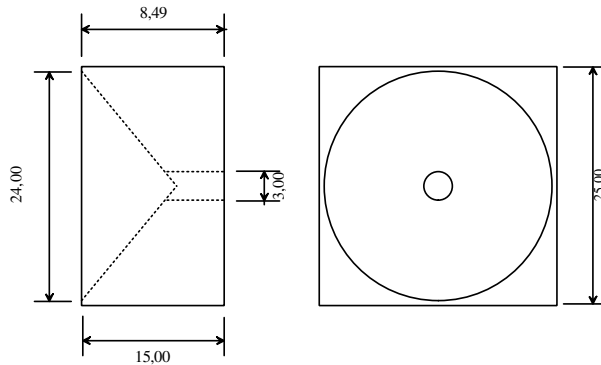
Stainless steel block with a machined hollow cone, in which the glass pieces that form the hollow pyramid will be mounted.
